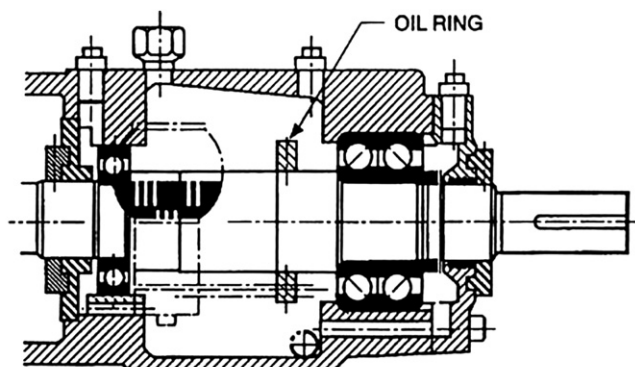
• Anti-friction roller bearings (Courtesy of Union Pump Co.)
